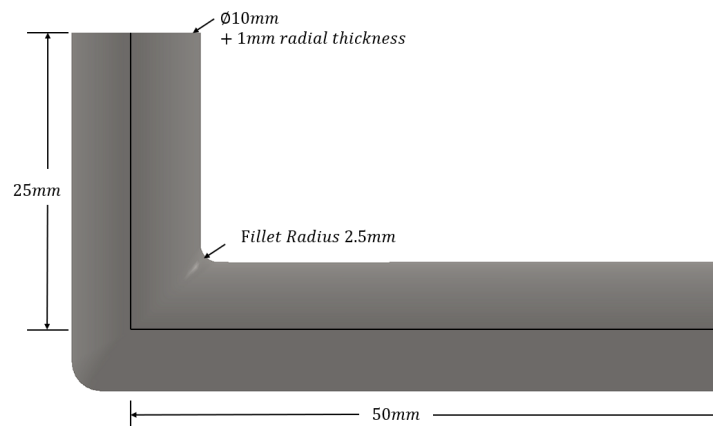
Dimension of L-Shaped Bent for FSI analysis
